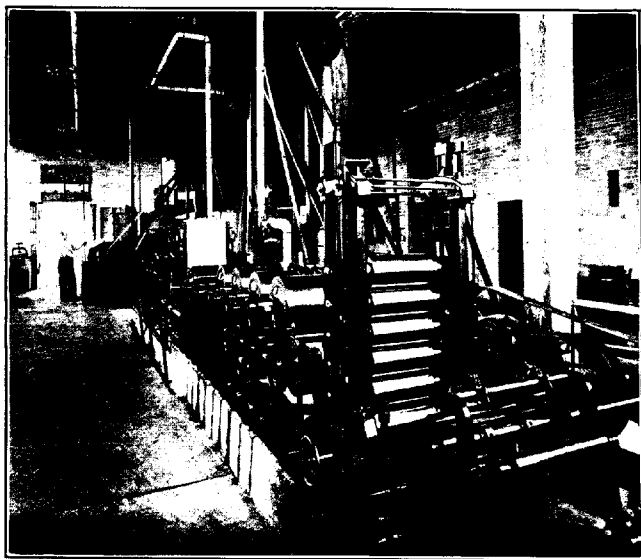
PULP AND PAPER LABORATORY, SHOWING FOURDRINIER PAPER MACHINE AND PULP EQUIPMENT.
